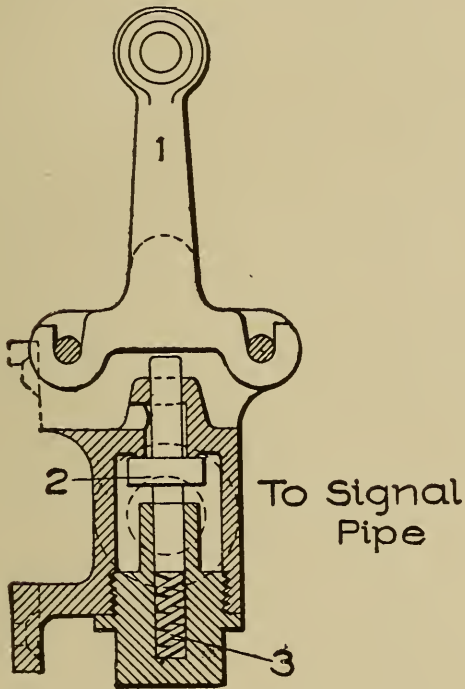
Section through Car Discharge Valve in Westinghouse Air-Signal System.
